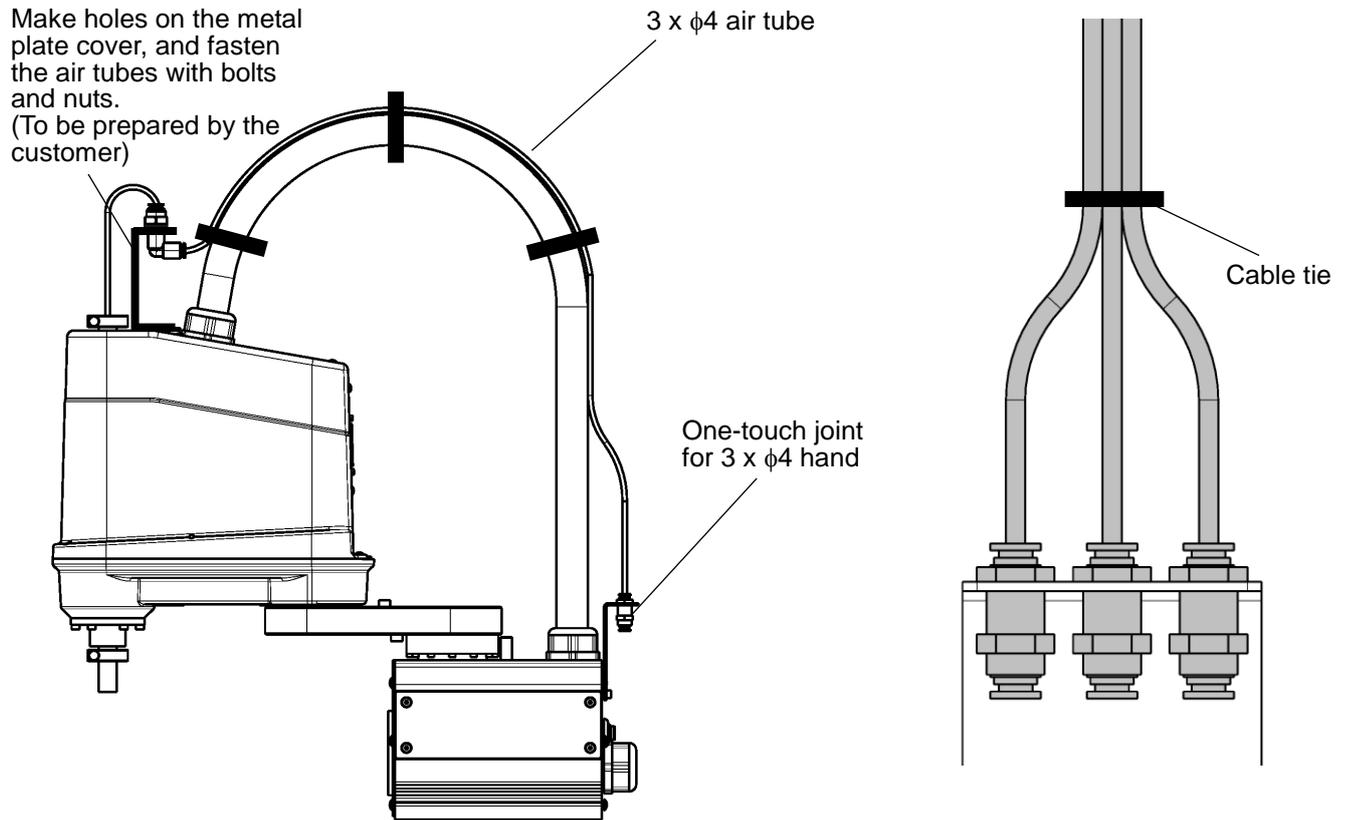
Tool air piping installation example (KHL-300 and KHL-400)
